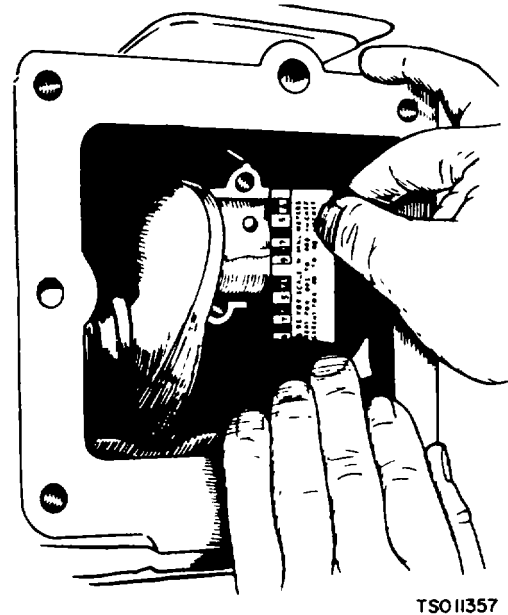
Measuring Bearing Clearance With Plastigauge
